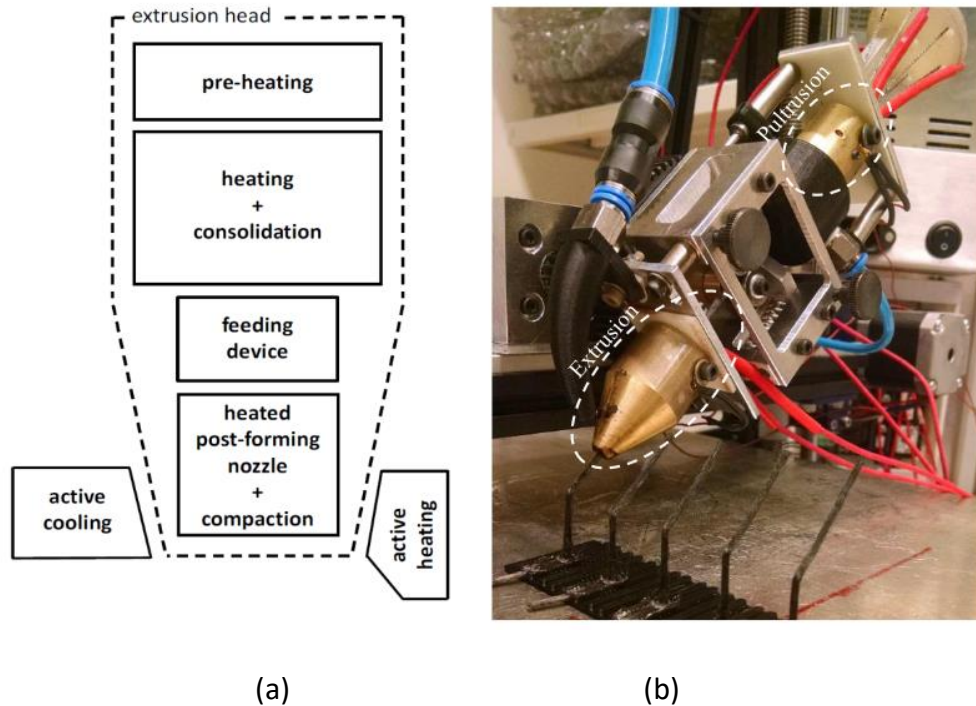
(a) Schematic illustration of CFLF processing head, (b) CFLF prototyping machine [38]
